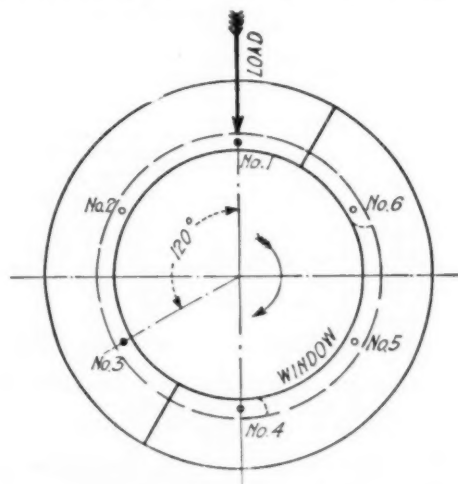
LOCATIONS OF THERMOCOUPLES IN BEARING SHELL
